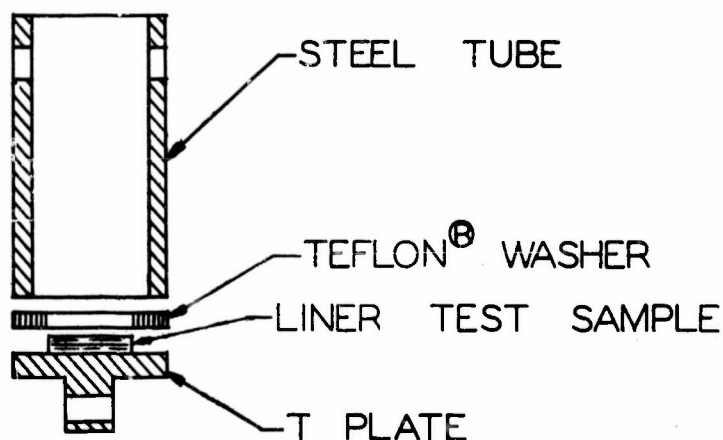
CASE-BOND JIG ASSEMBLY.
